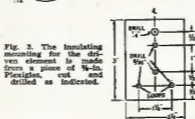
The insulating mounting for the driven element is made from a piece of ¼-inch Plexiglas, cut and drilled as indicated.
